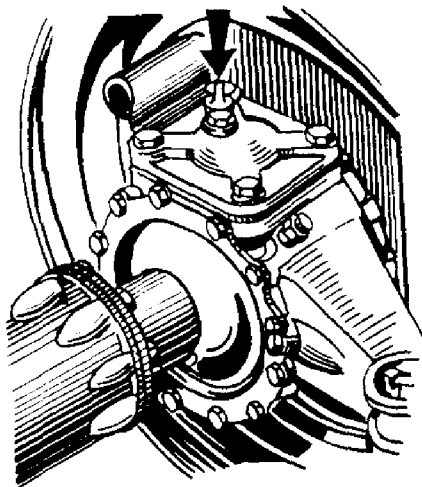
LUBRICATING POINT FOR AM LUBRICANT USED IN FRONT AXLE SHAFT JOINT AND KING PIN BEARINGS OF ЗМЛ-131 TRUCK
